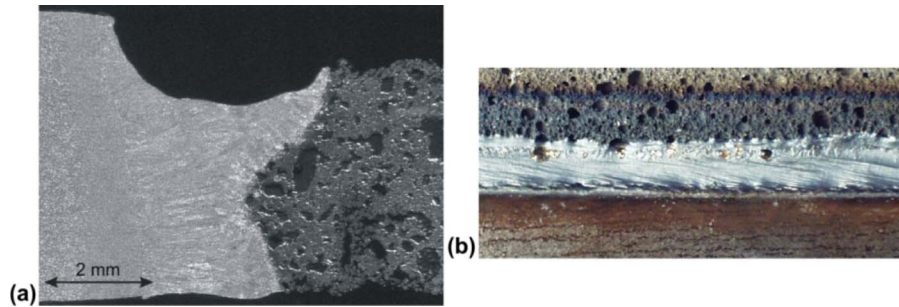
Specimen welded using variation 1: (a) macrosection and (b) top view
